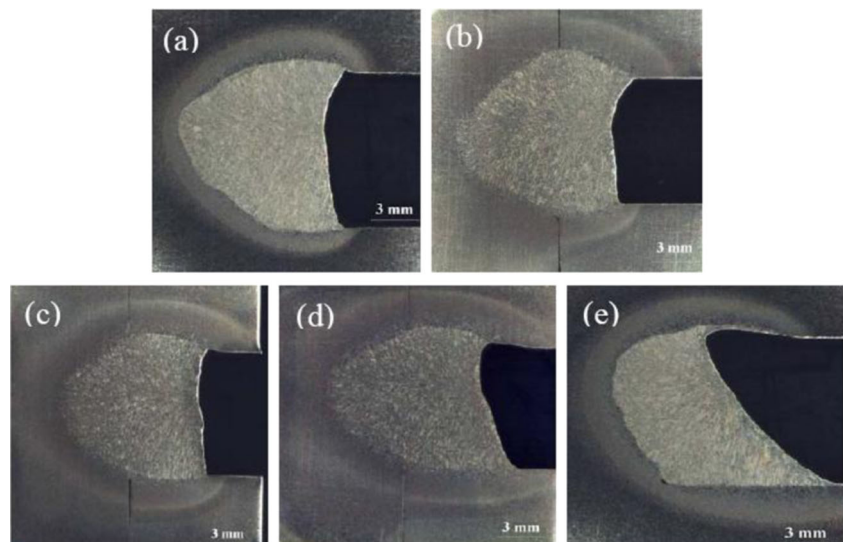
Cross-sections of weld with different arc rotating radius: a 2 mm; b 2.6 mm; d 3.6 mm; e 4 mm [12]
